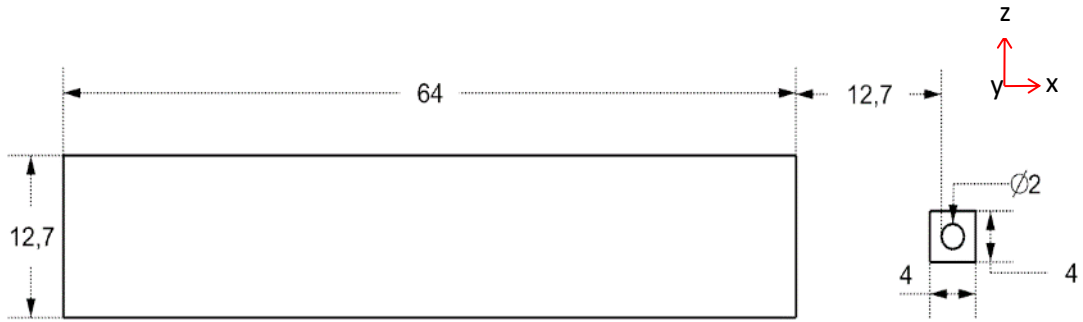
Dimensions of the piezoelectric fan and 1-fin-block in top view (in mm)
